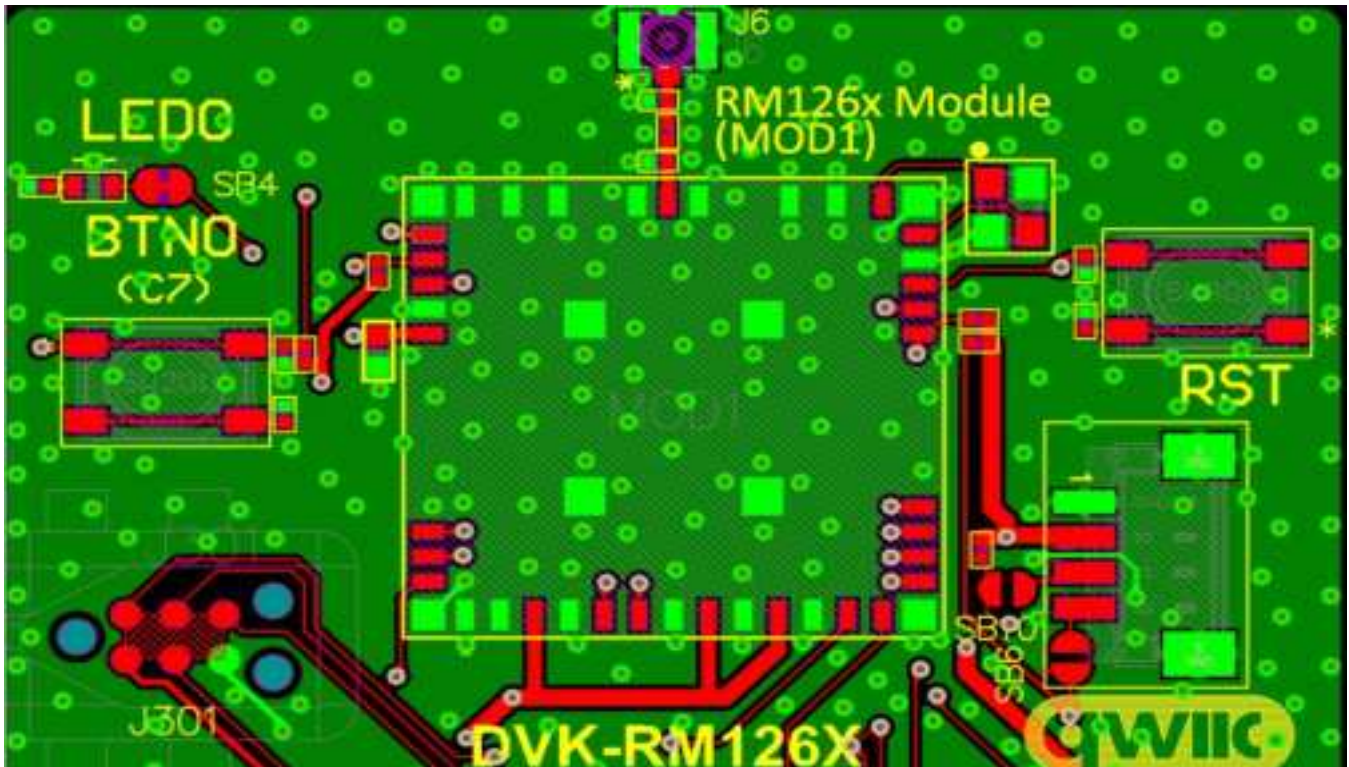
RM126x module PCB placement and grounding (shown in green) on DVK-RM126x PCB (part of DVK-RM126x PCB with RM126x module shown only) with RM126x module placed near the edge.
